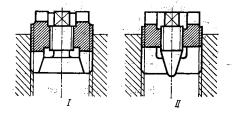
Split-end hollow screws locked by taper inserts in any axial position 24
